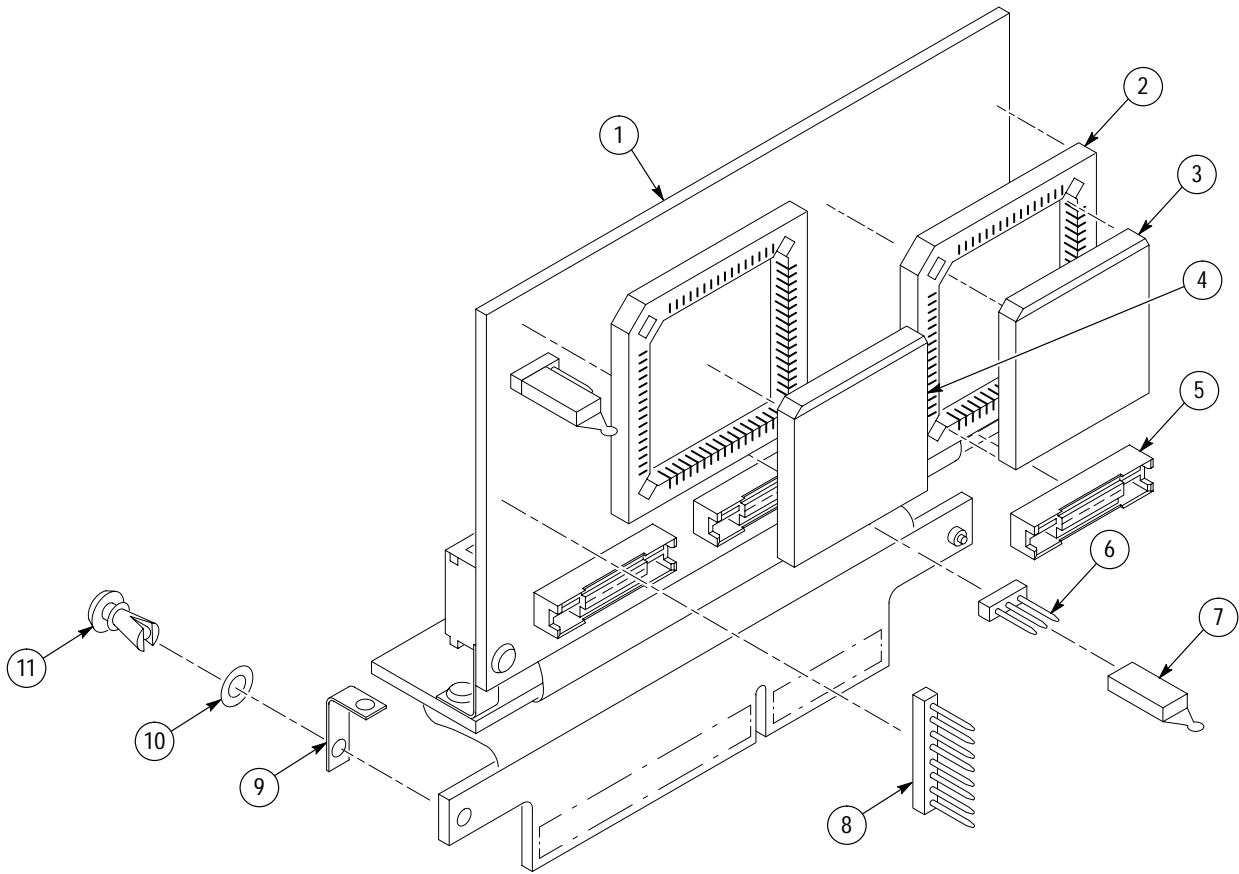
Accelerated Graphics Port probe adapter exploded view
